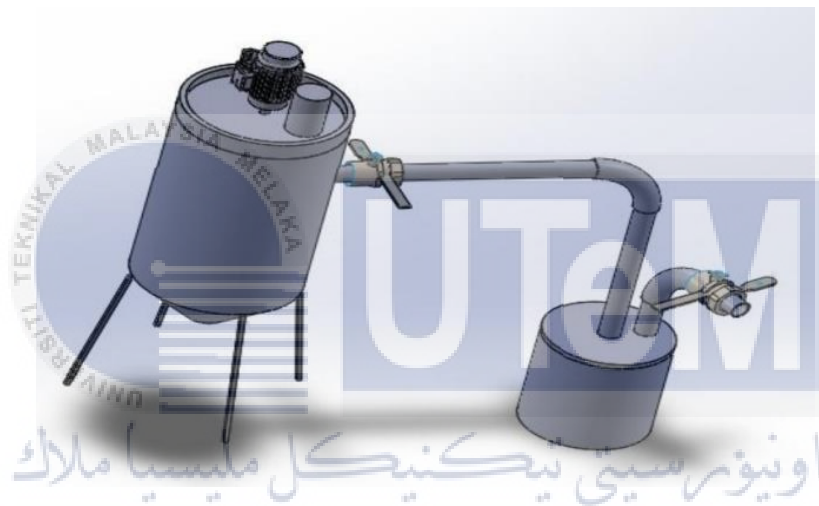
Galvanized steel lagged with fiber glass bio digester
